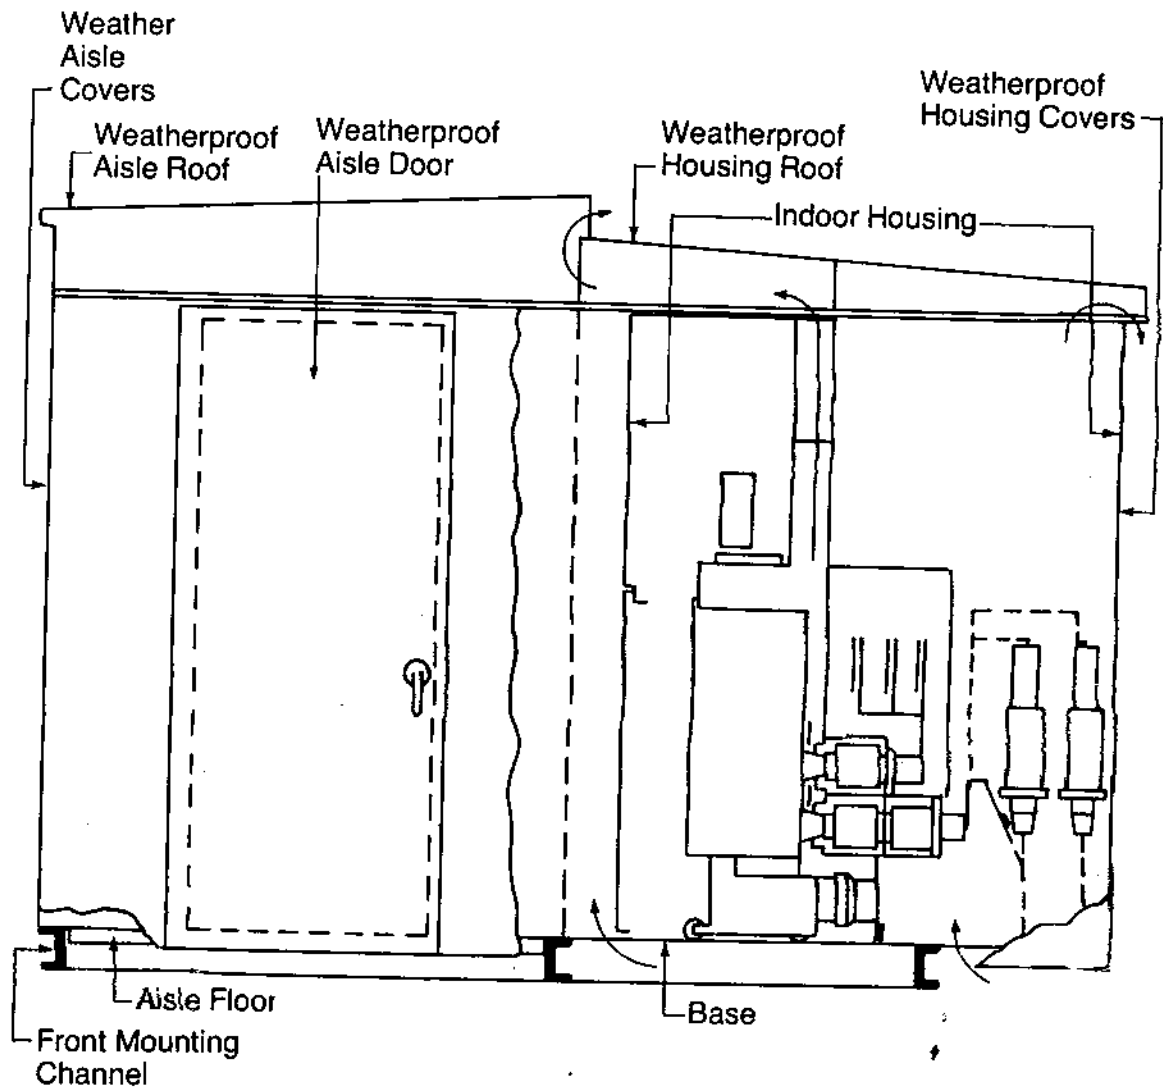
Outdoor, Walk-in Metal-Clad Switchgear - Breaker Unit Diagram
